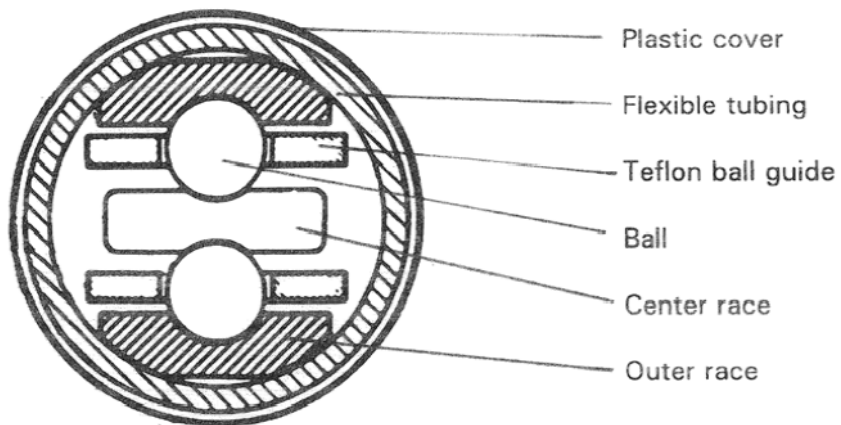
Typical Cross Section of Throttle Cable Assembly Design
